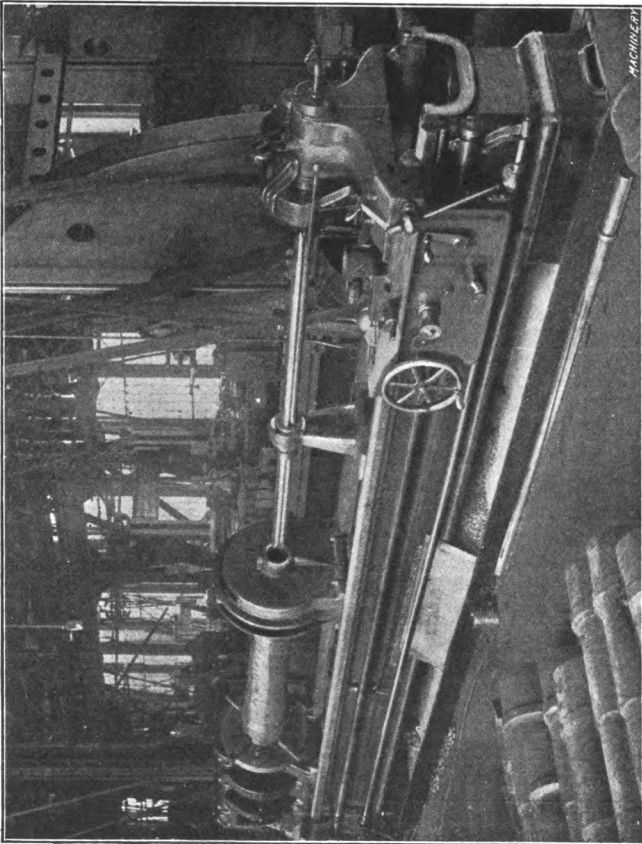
An Improved Design of Boring Lathe for Drilling the Axles
